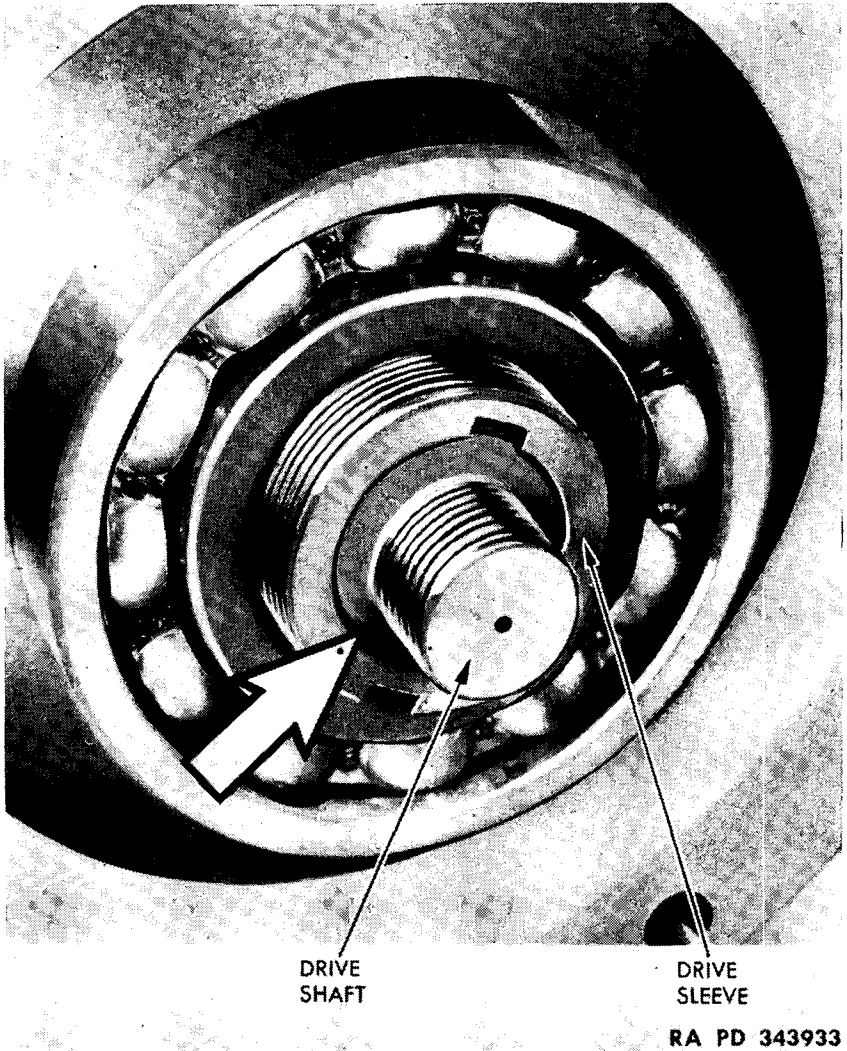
Extension of Clutch Drive Shaft Beyond Clutch Drive Sleeve
